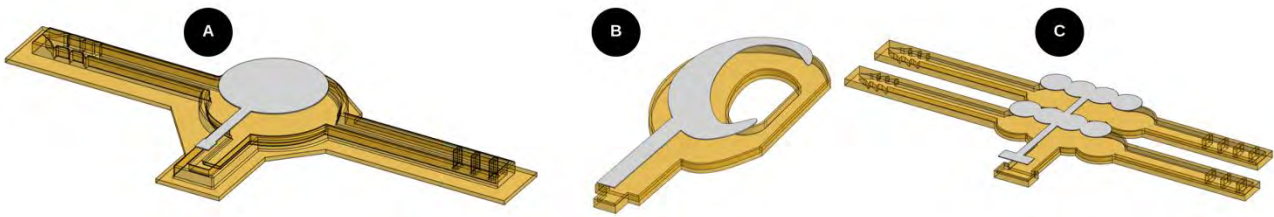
The 3D printed mould and separator during the fabrication process for the PneuMa case study.
